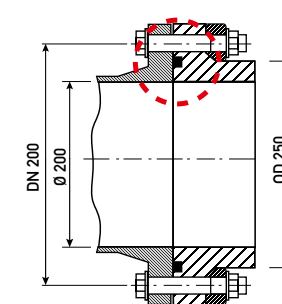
Special flange connection with no offset of inner pipe wall (red marking) and small DN 200 valve
